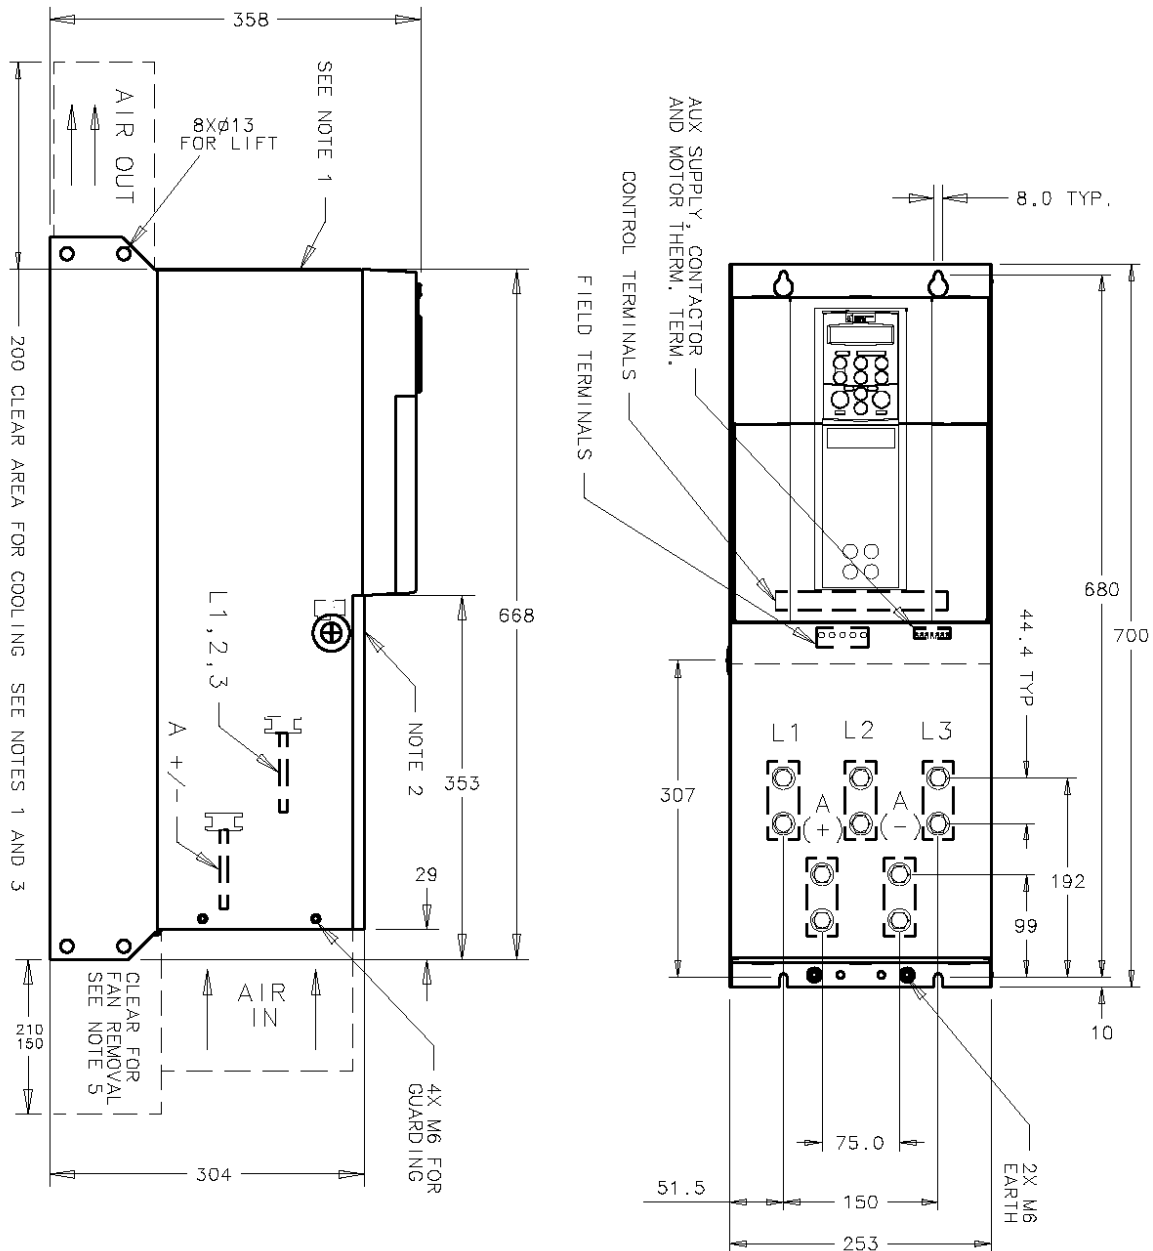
Frame 3 : 270A Stack Assembly - Drg No. HG466428
